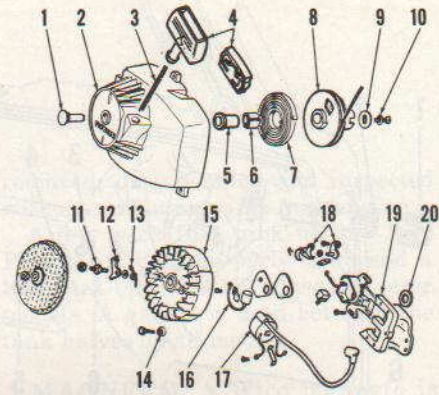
Exploded view of magneto and rewind starter. Steel bushing (5) and nylon liner (6) is used instead of bronze bushing used on early models. Some models use one pawl assembly (11, 12 & 13) and one balance weight (14); others are equipped with two starter pawl assemblies.
